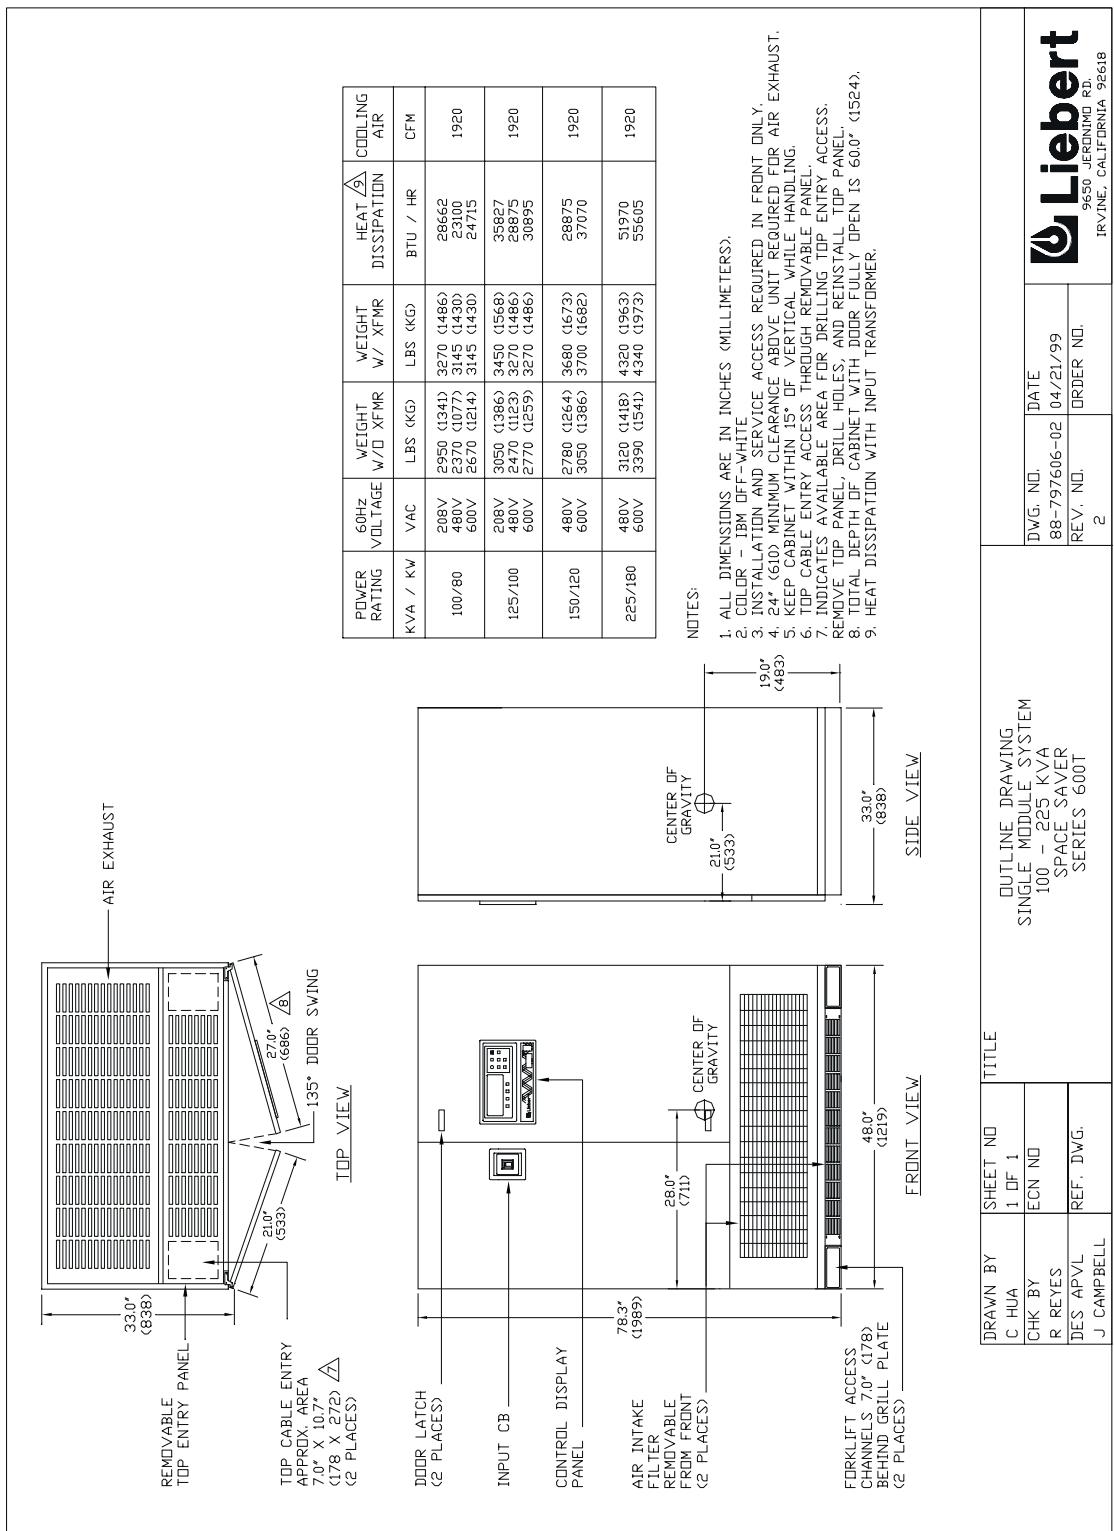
Outline Drawing, 100 through 225 kVA Module with SpaceSaver Top-Entry Configuration
